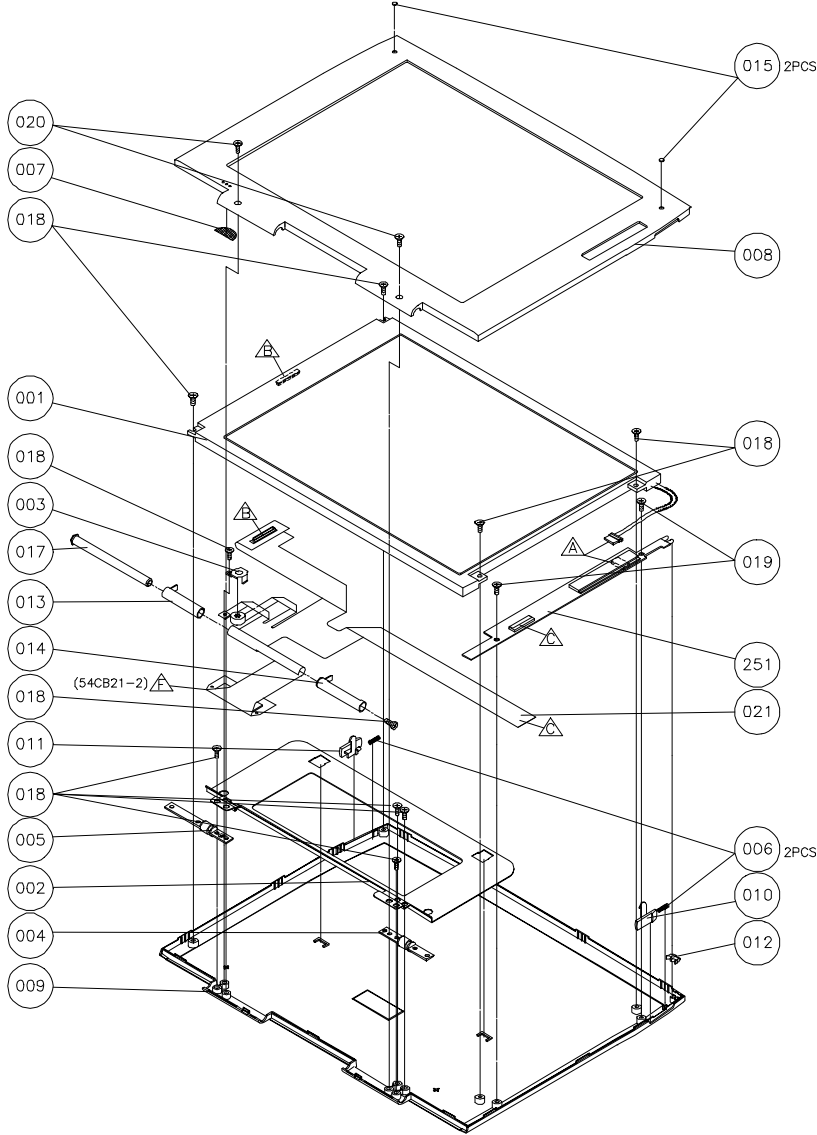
LCD Assembly IPB for GA/GI Panel
